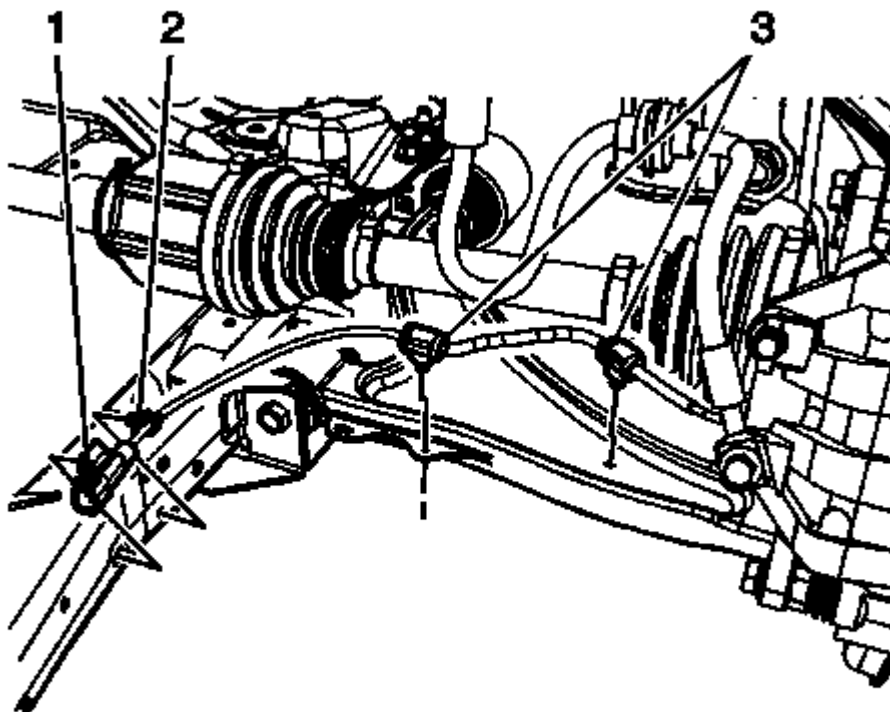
Wheel Speed Sensor Electrical Connector & Harness Clips
